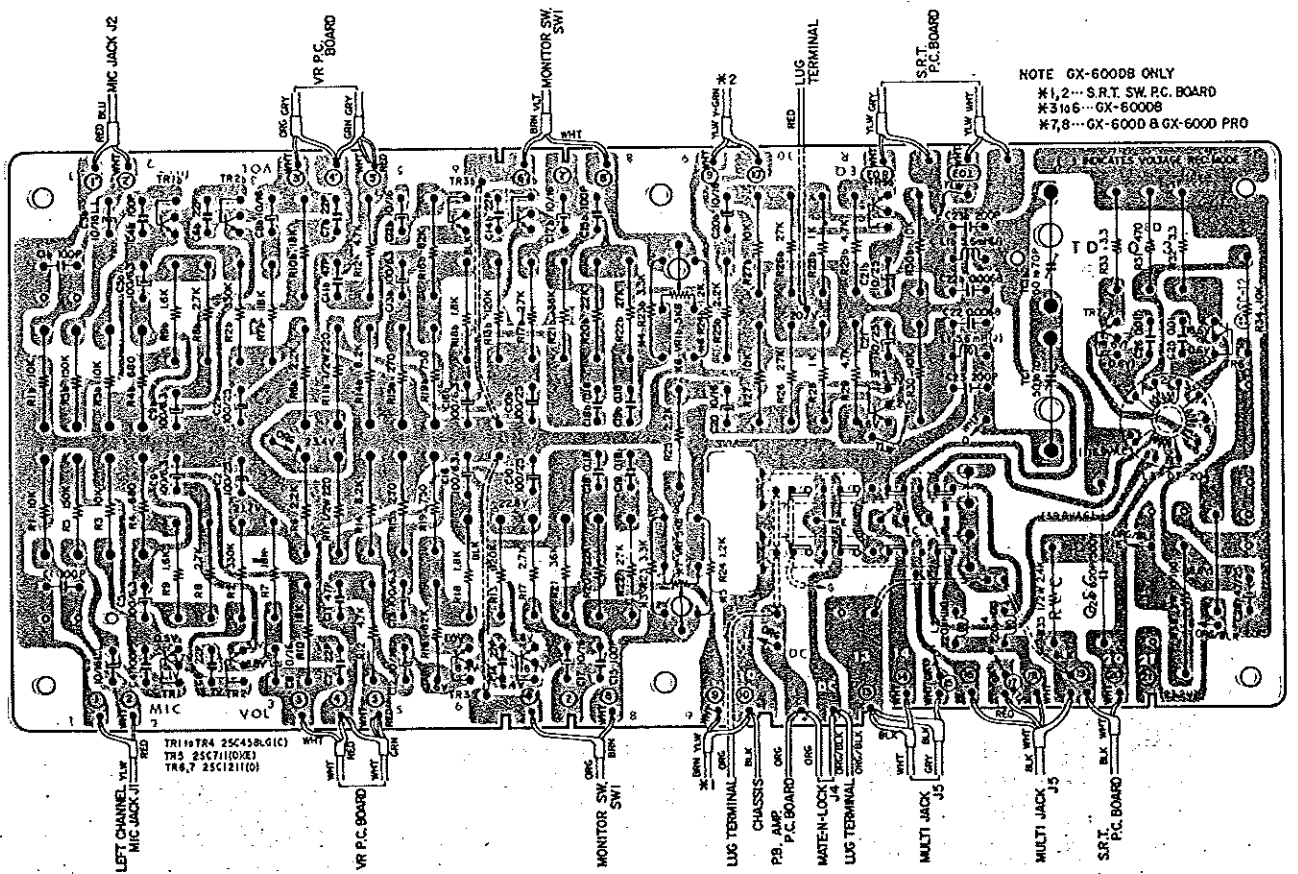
REC. AMP./OSC. P.C. BOARD TD-5003 (Reverse Side)
